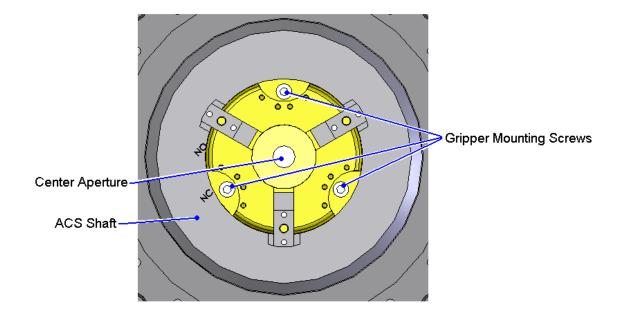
Mounting Holes for Three-Jaw Gripper
